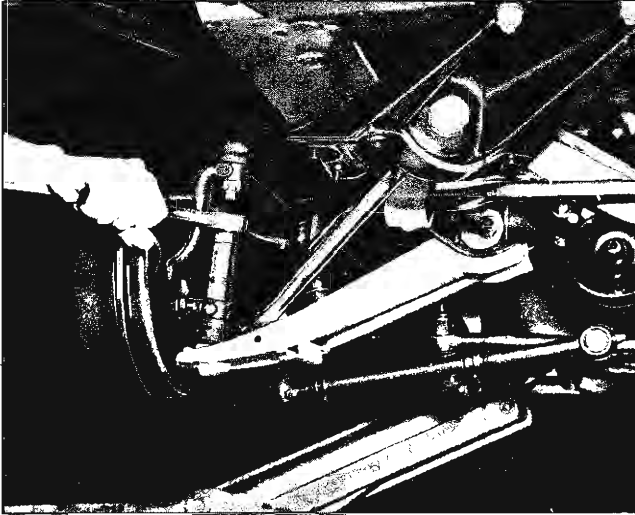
Disassembling Lower Ball Stud—Chevy II
